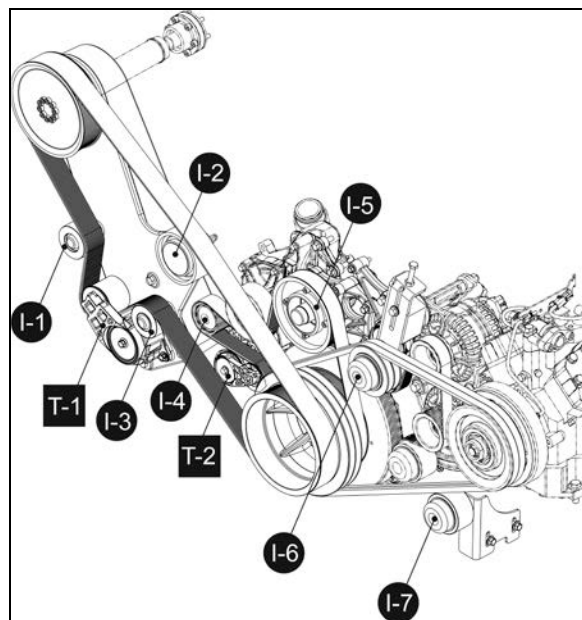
IDLER PULLEYS AND AUTOMATIC BELT TENSIONERS ON COOLING FAN DRIVE, WATER PUMP DRIVE AND A/C COMPRESSOR DRIVE
